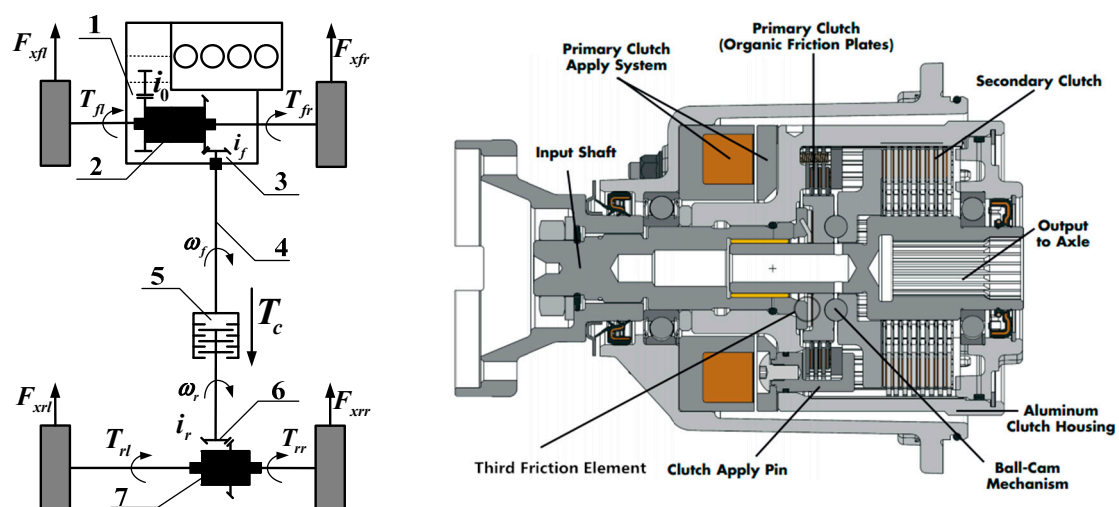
Whole vehicle layout and the EMTC; 1—final reducing drive, 2—assembly of front axle differential, 3—power transfer unit, 4—driving shaft, 5—center coupling, 6—rear axle reducer, 7—assembly of rear axle differential.
